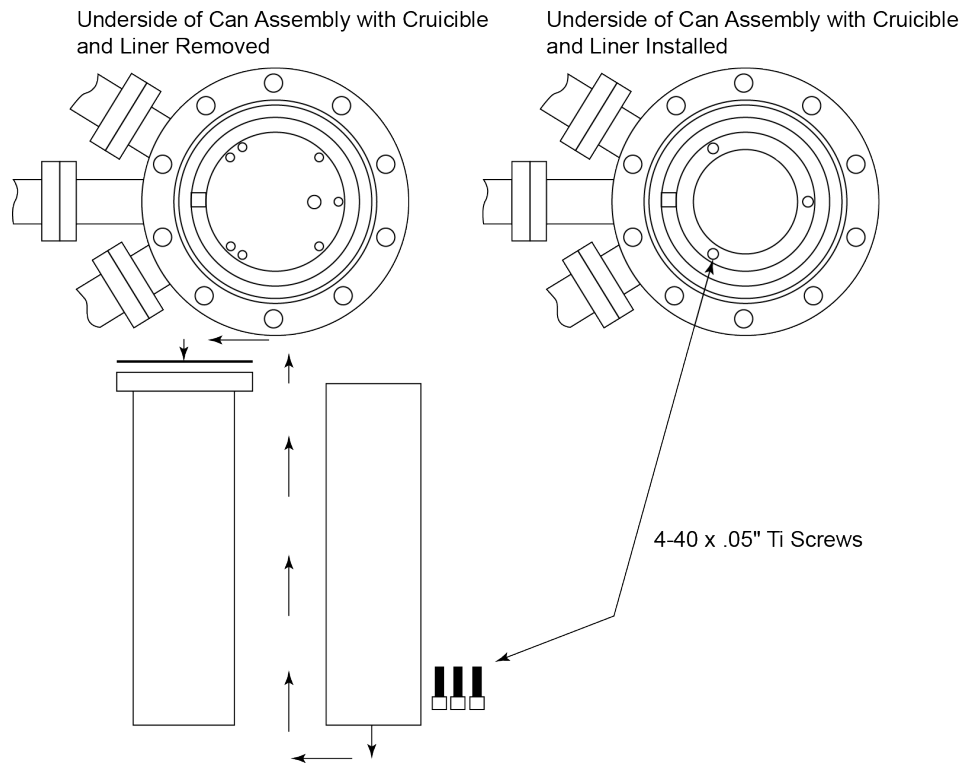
Mounting of the Crucible (3 or 4 screw hole pattern possible)
